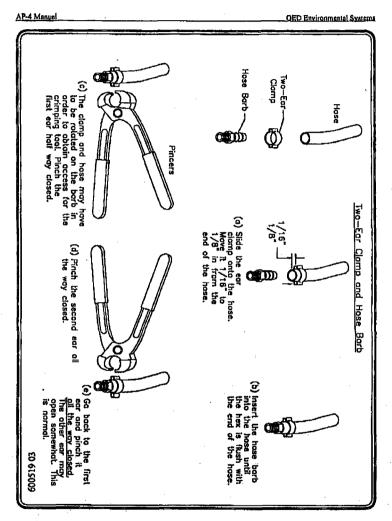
Two-Ear Clamp and Hose Barb Assembly Instructions
